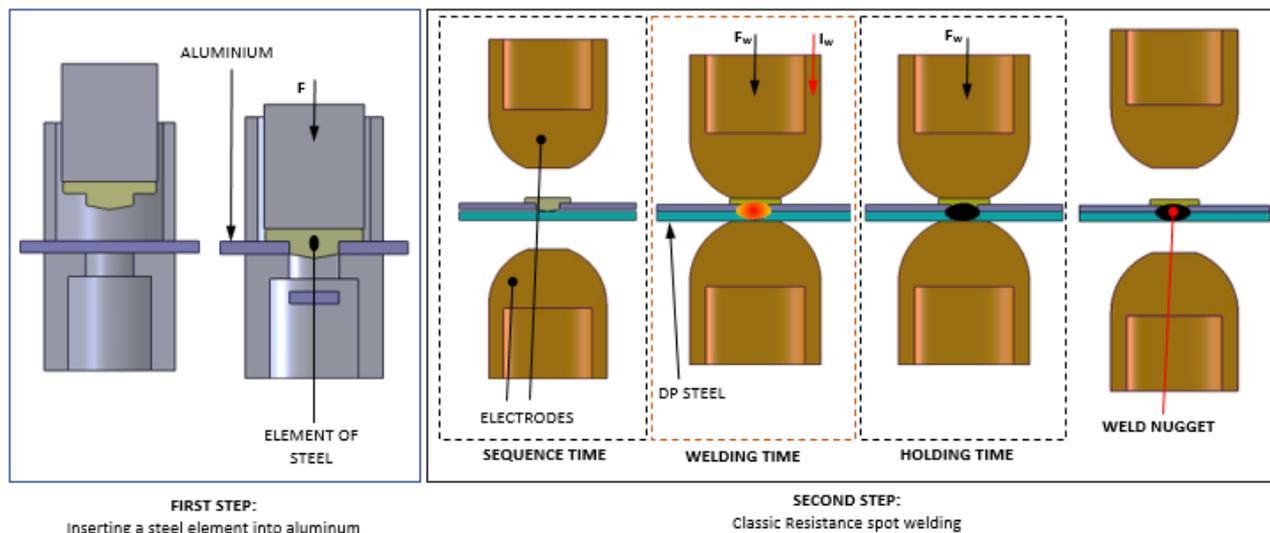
Process of Resistance element welding (REW) [7]
